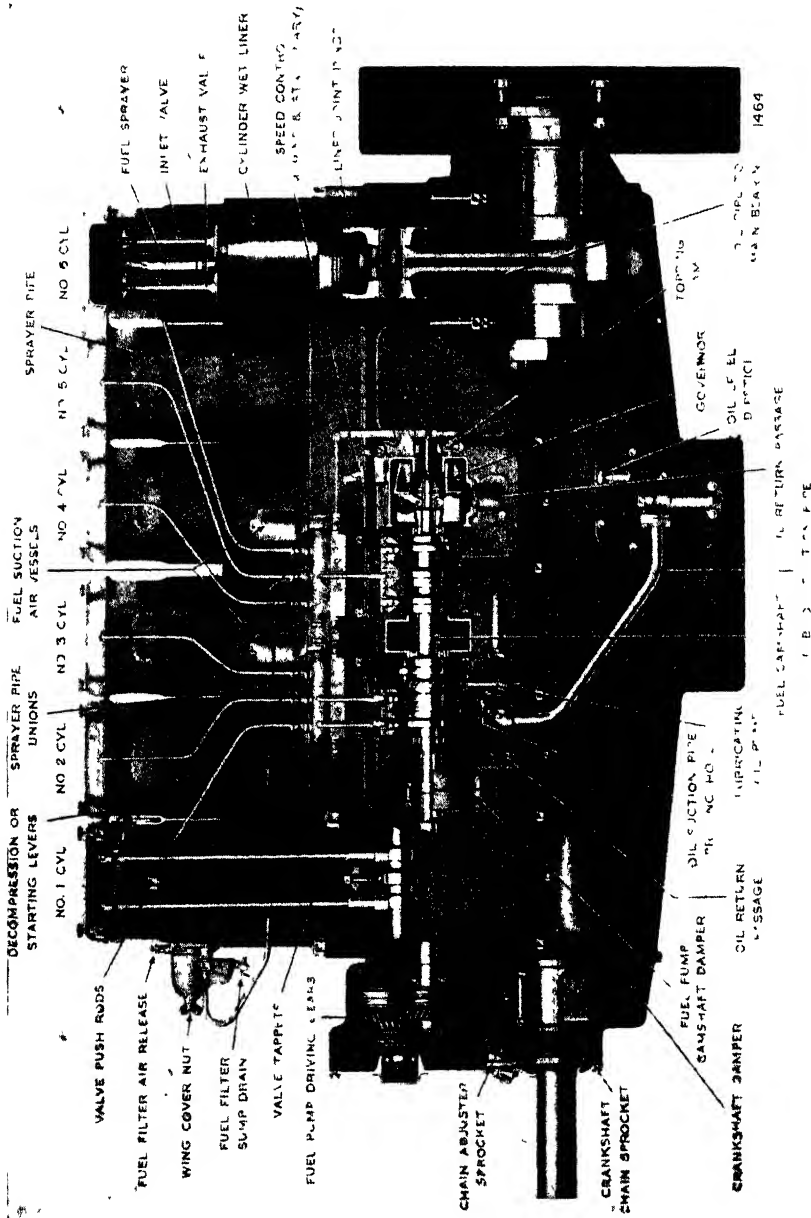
PART SECTION OF GARDNER 613 OIL ENGINE
